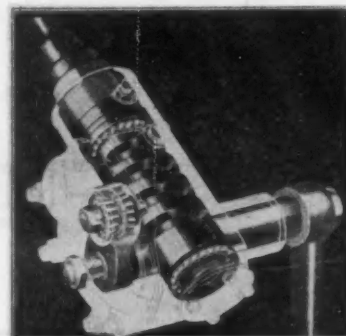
Roller-bearing pin was added by Ross to cam-and-lever gear to make it an antifriction type.
